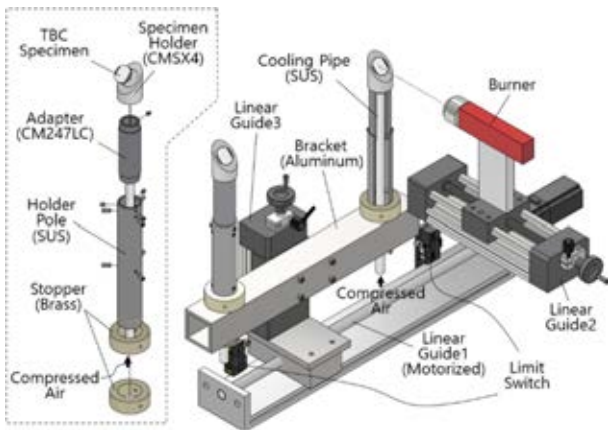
Illustration of automatic specimen moving system with exploded diagram of holder part
